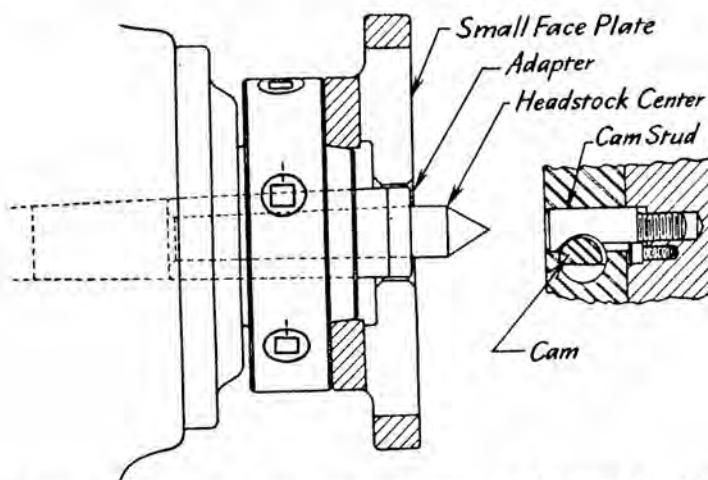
Cam-lock type spindle nose showing adapter and headstock center in place.
